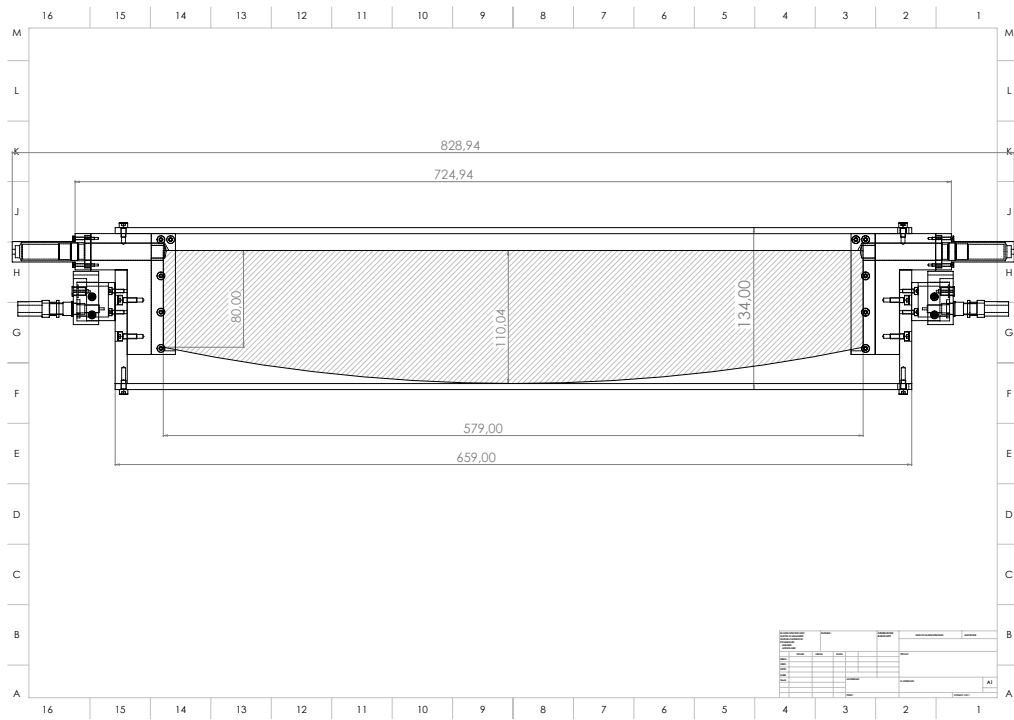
Technical drawing of a scintillator inside the aluminium case. The dimensions of each part are expressed in mm.
